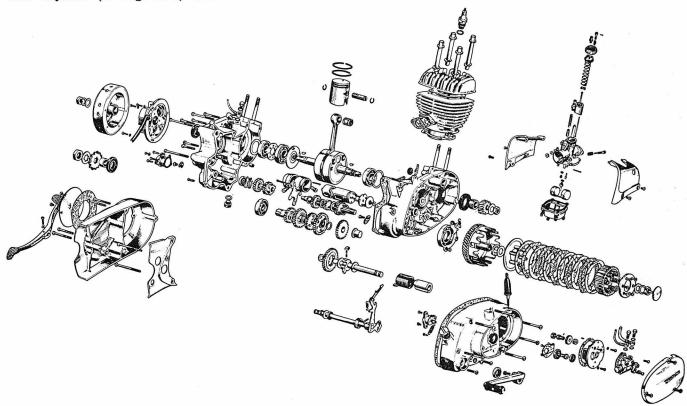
Exploded view of the engine and transmission assembly used on B100-P and B105-P models. TC120 models are similar except for the dual range transmission (Fig. S3-15).
